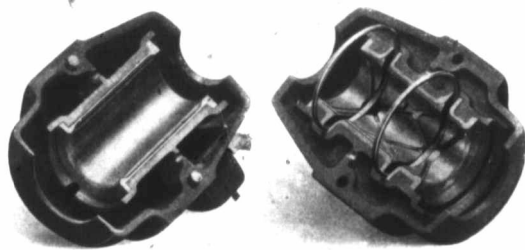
Bearing Housing Open, Showing Bearings and Oil Rings, Bracket Construction
